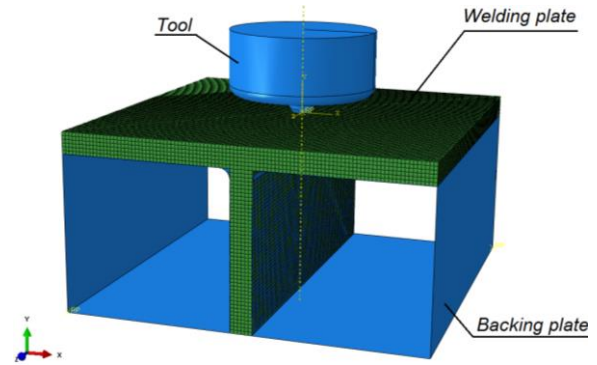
Numerical model of welding plate, tool, and backing plates.
